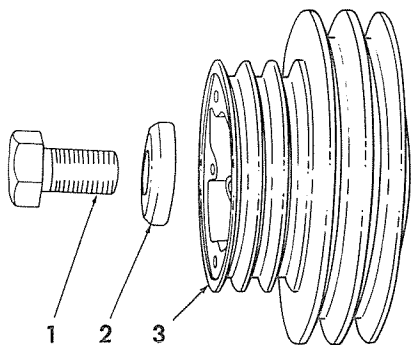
Crankshaft Pulley (Used on Motor Graders) (T-71016)
